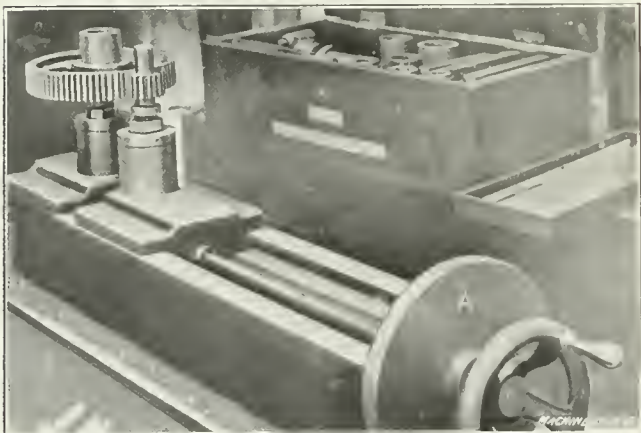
Gear-testing Machine with Extra Large Graduated Dial
